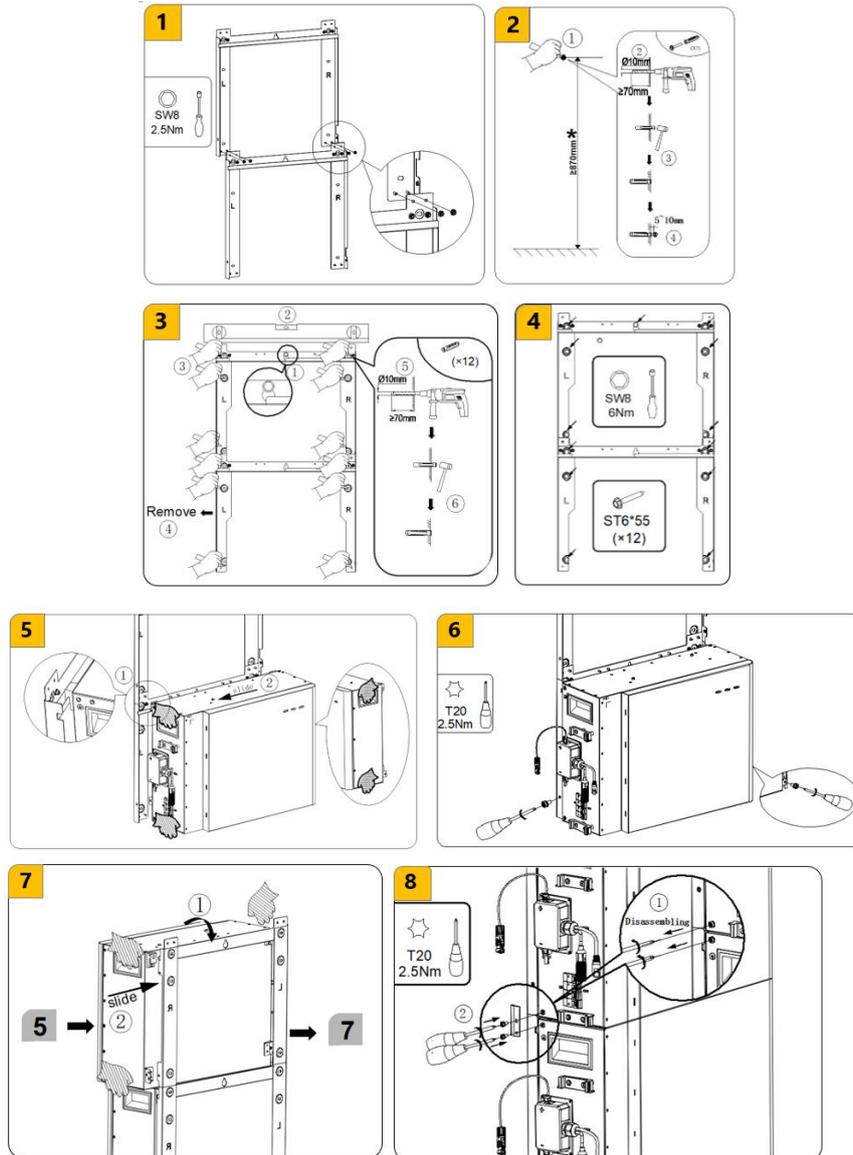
5 Multiple battery wall-mounted brackets are installed
